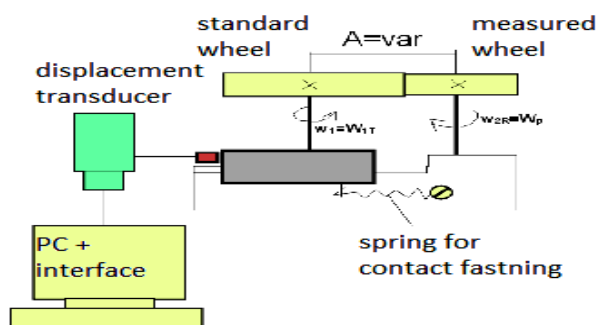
The scheme of toothed wheel testing based on both sides engagement
